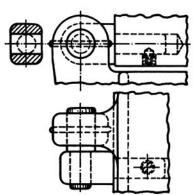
Separable lugs are used when the casting is too large for small lugs to cast satisfactorily.
